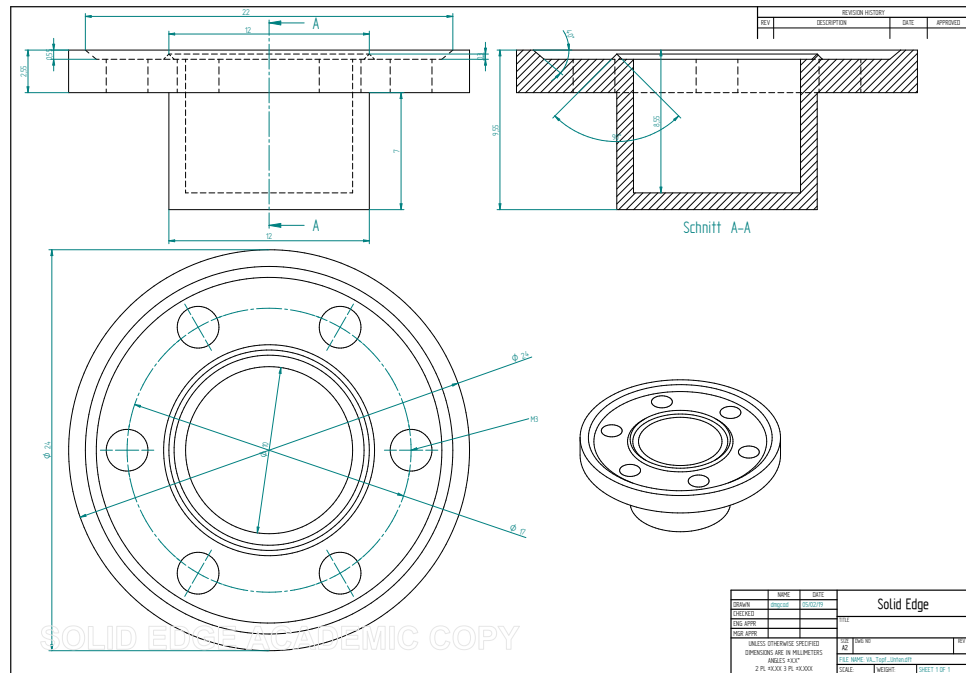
Detailed technical drawing [84] of the bottom part of the modified container design for performing mass loss experiments.
